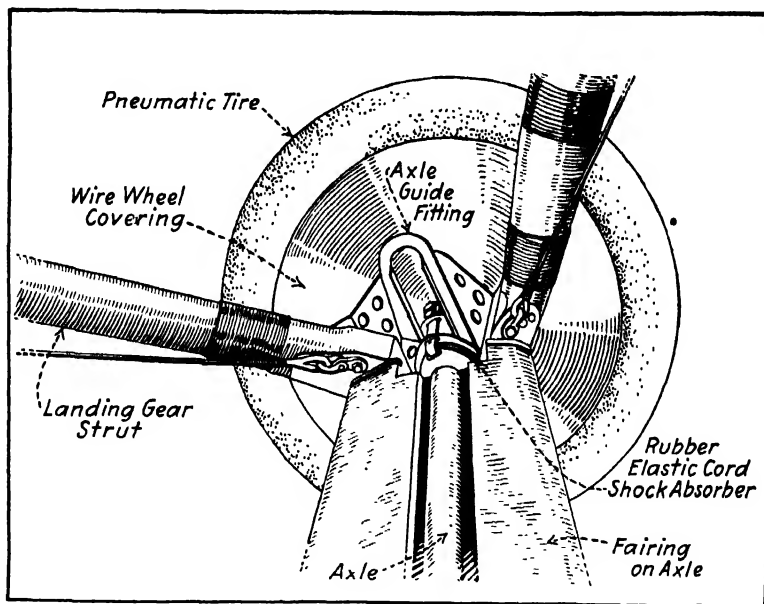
Showing Wheel, Axle, and Shock Absorber Parts of Landing Gear Suitable for Medium Weight Airplane.
